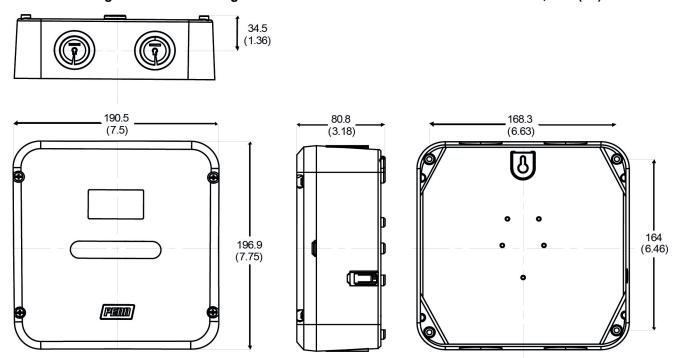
A52x Refrigeration Control with IP65 Enclosure Dimensions, mm (in.)
